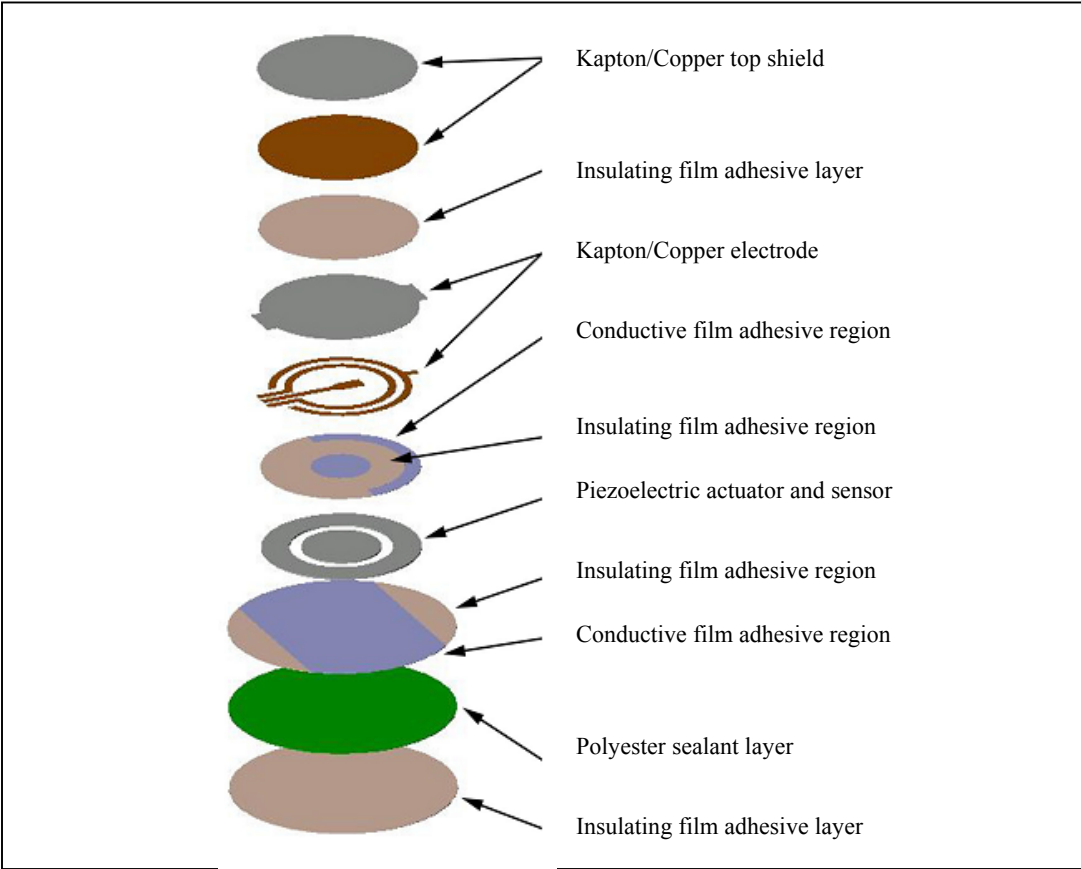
Electrode assembly, fastening assembly and piezoelectric actuator/sensor stack
